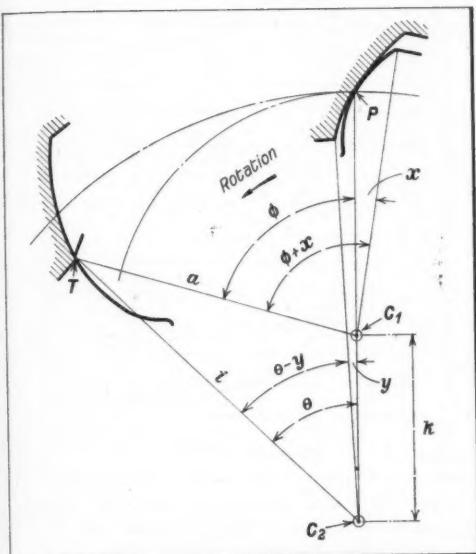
Diagram illustrating disengagement interference in involute internal gears
